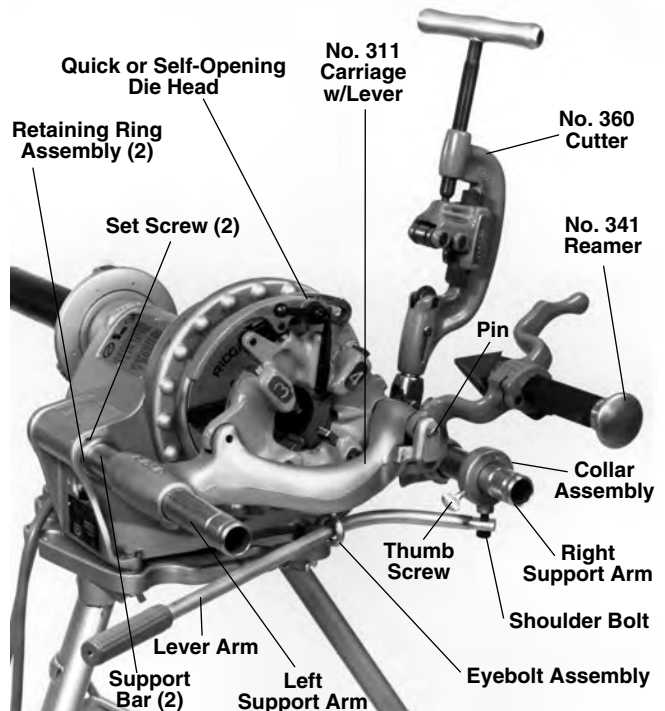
No. 300 Power Drive with 311A Carriage, 360 Cutter, 341 Reamer and Die Head
